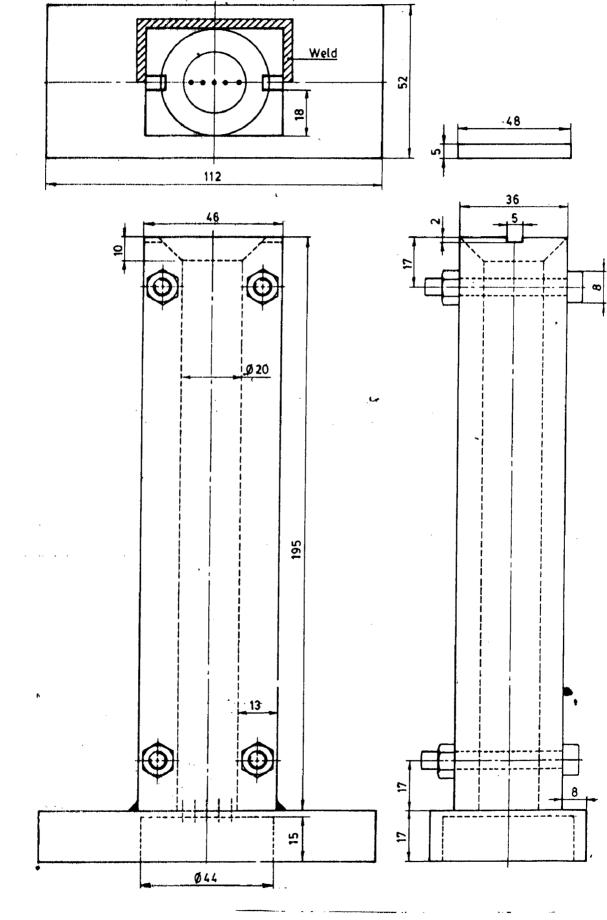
The diagram and dimensions of M S mould used for reinforced casting.
